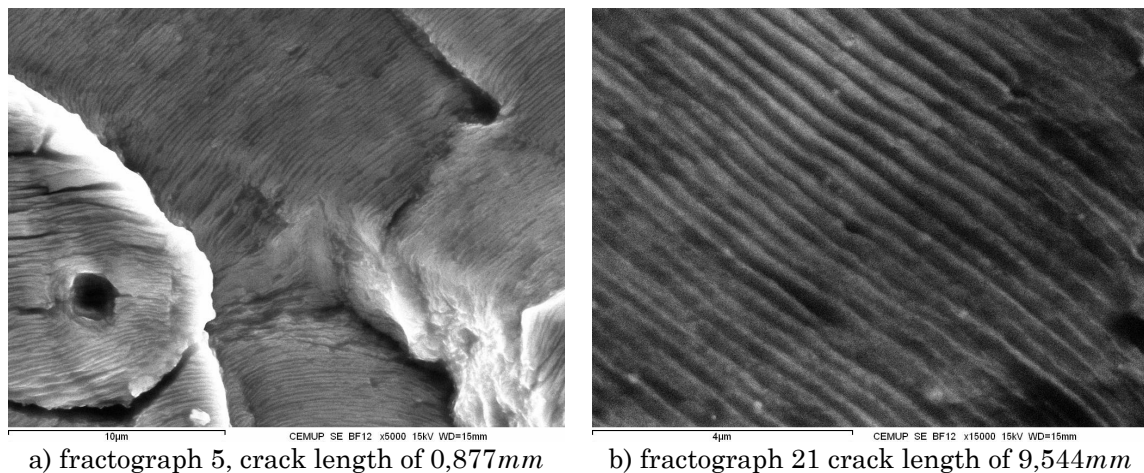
Fatigue striations for two crack lengths, AA6061-T6 MIG welded specimen.
